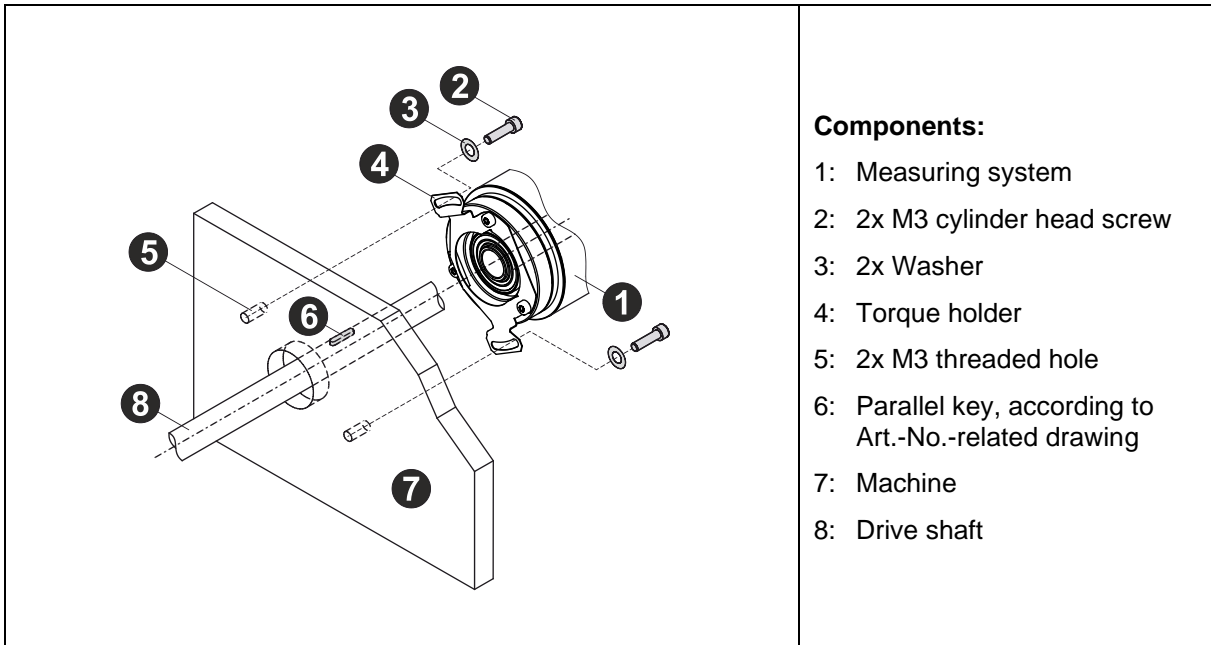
Mounting with torque holder (Spring metal sheet with two wings), principle illustration
